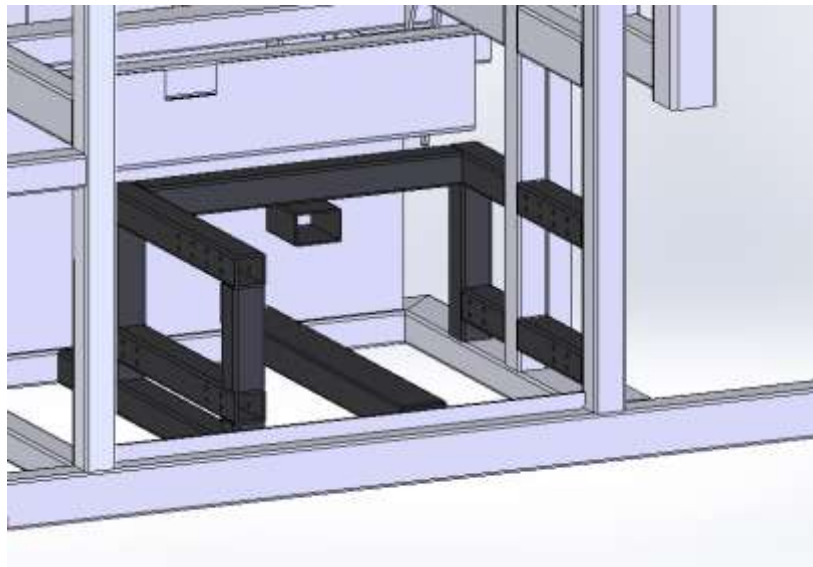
Subframe addition to support design components. Dark grey components are new frame members which will be added to the existing Crown frame.
